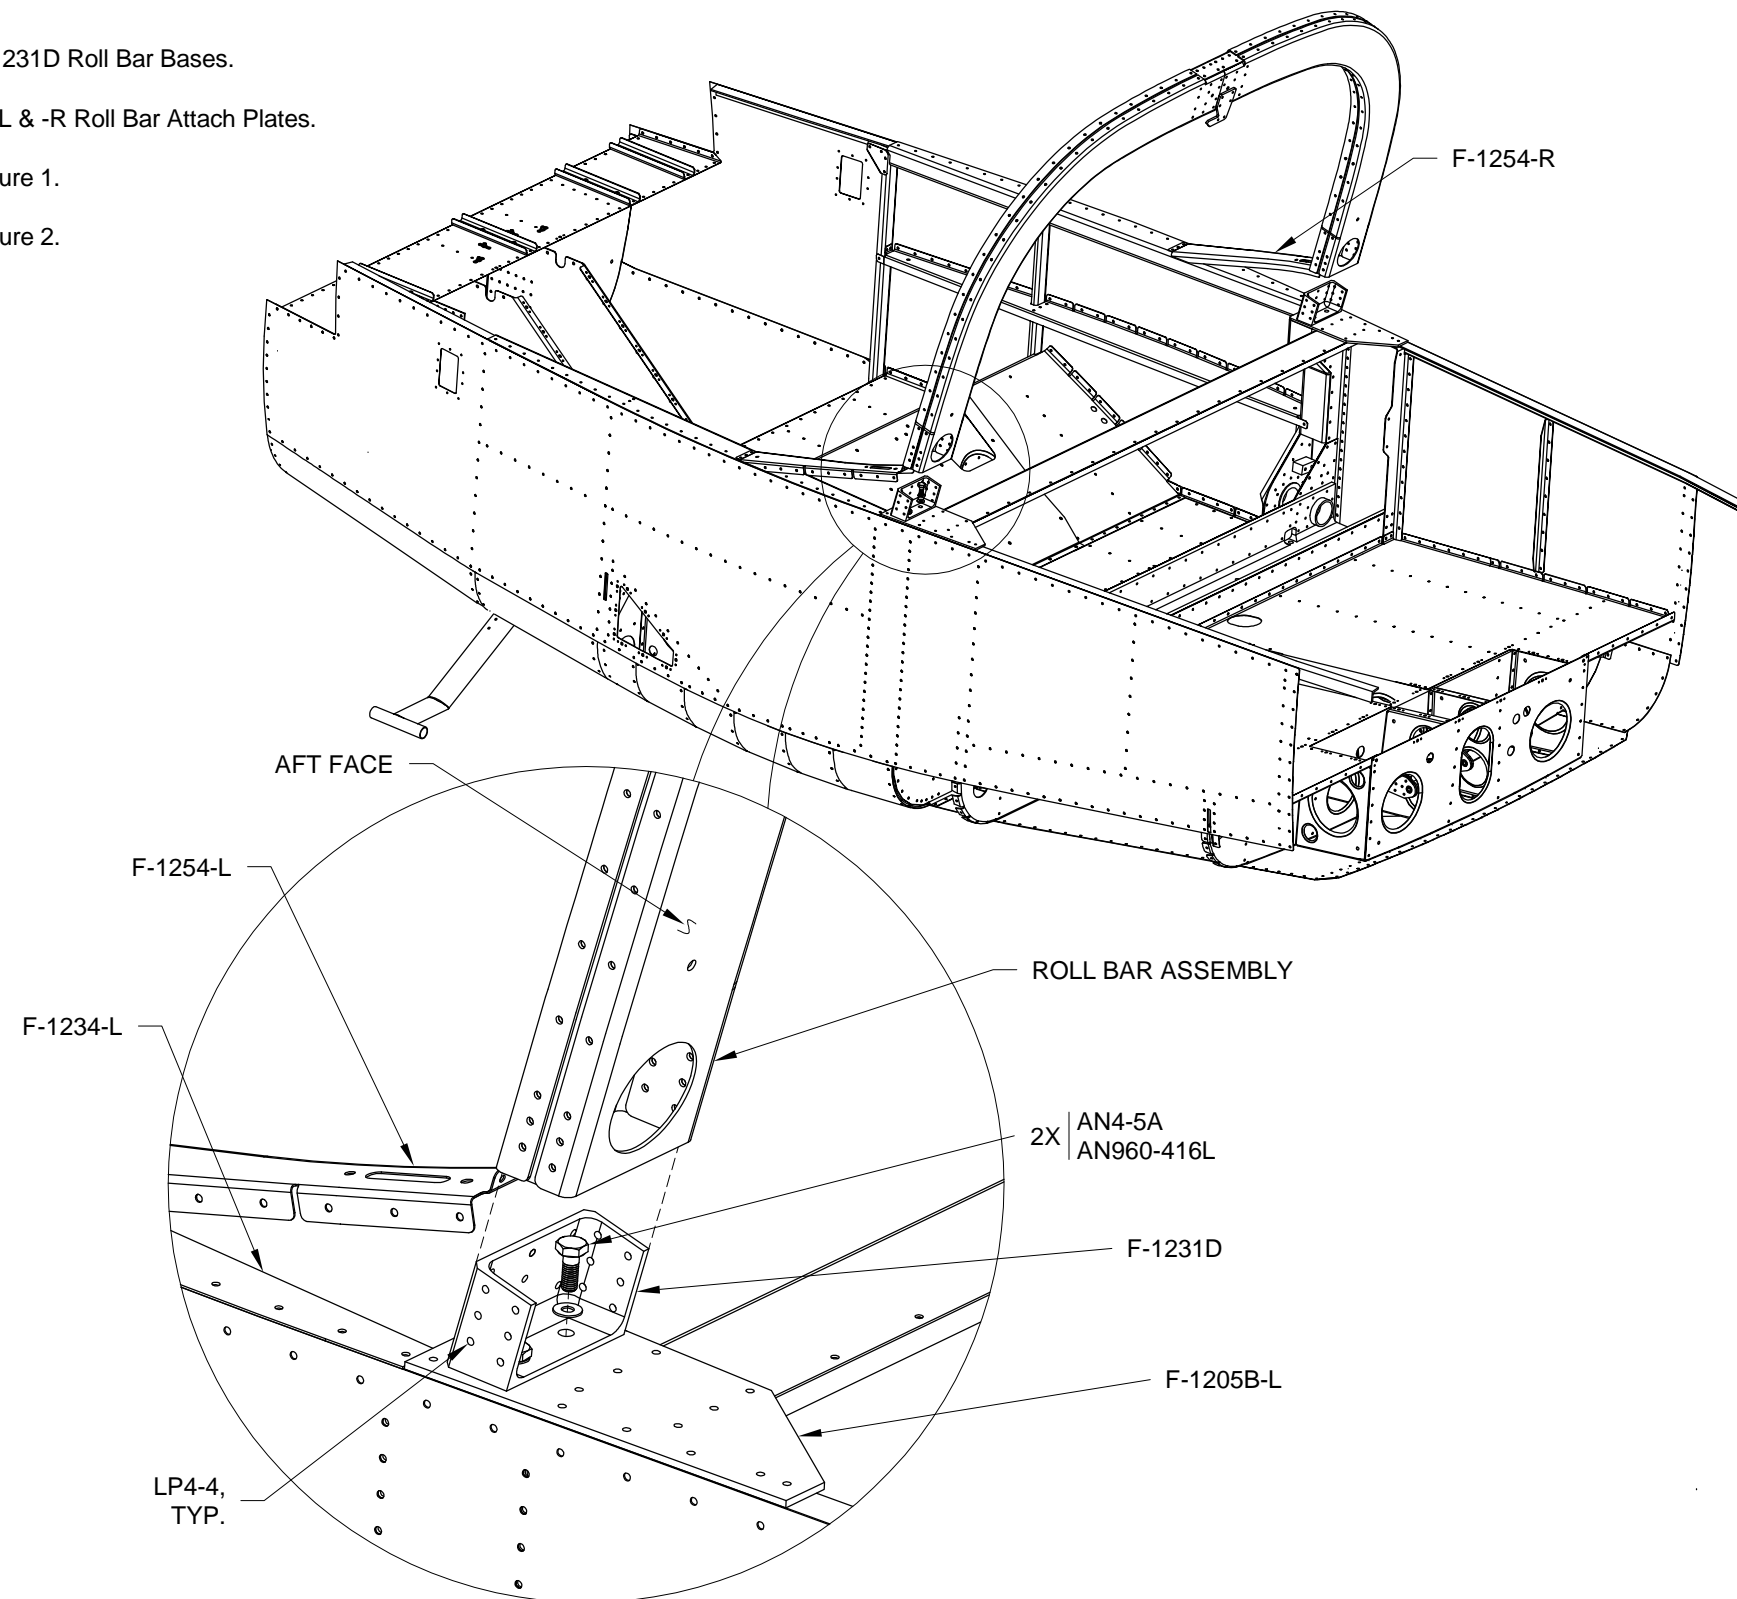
INSTALLING THE ROLL BAR ASSEMBLY
